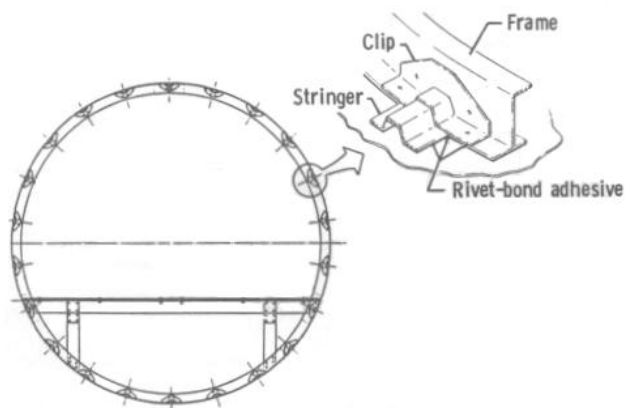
Cross-section of the stiffened, floor-equipped composite cylinder and a detailed view of the rivet-bonded frame-stringer-shell intersection.
